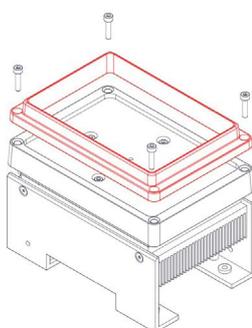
· Unscrew the 4 screws at the corner and remove mounting frame
